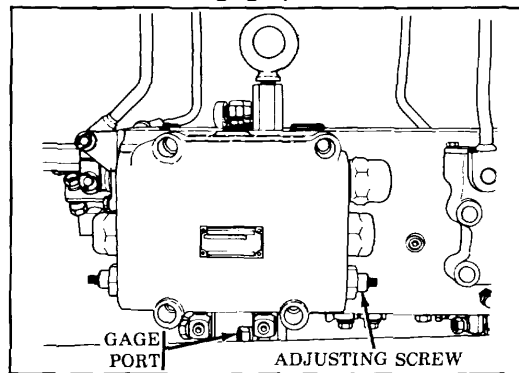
Boom combination control valve gage port and adjusting screw.
